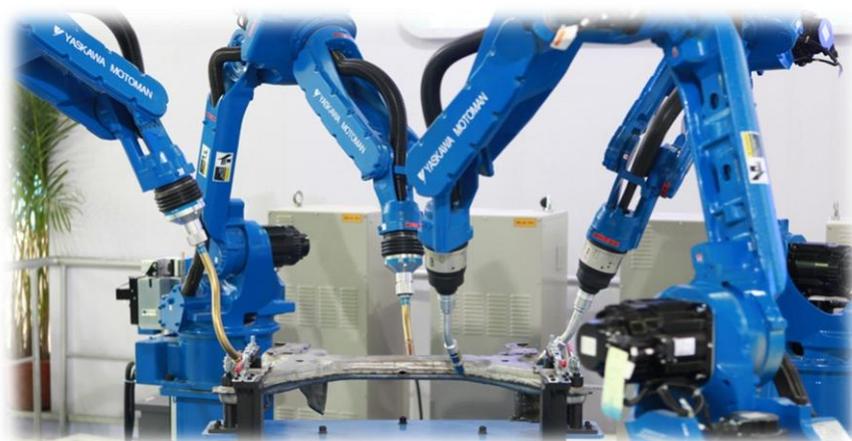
Industrial robots welding robot arc welding robot cutting robot
